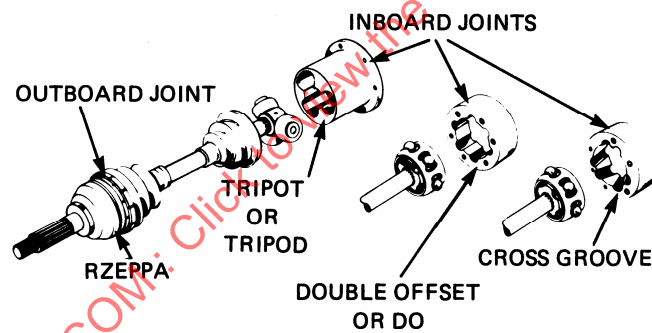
TYPICAL FRONT-WHEEL-DRIVE HALFSHAFT WITH ALTERNATE INBOARD END MOTION UNIVERSAL JOINTS
